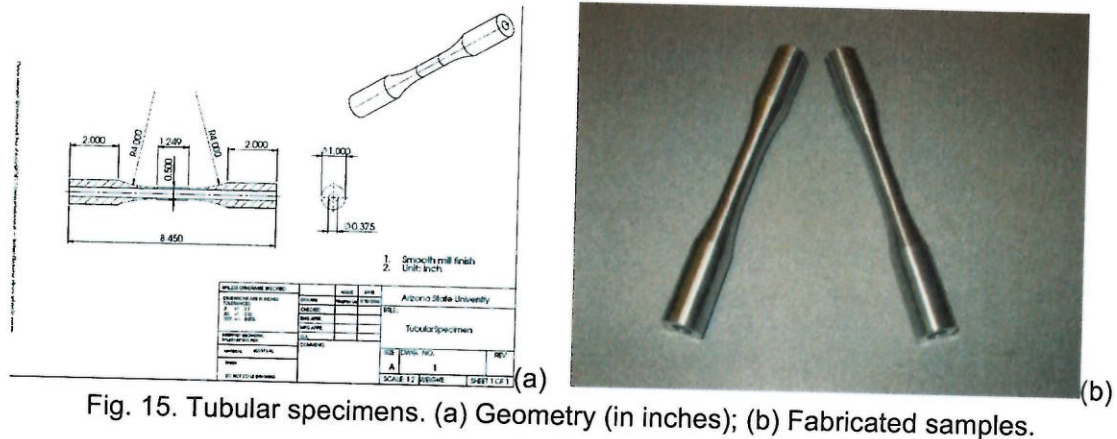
Tubular specimens. (a) Geometry (in inches); (b) Fabricated samples.
